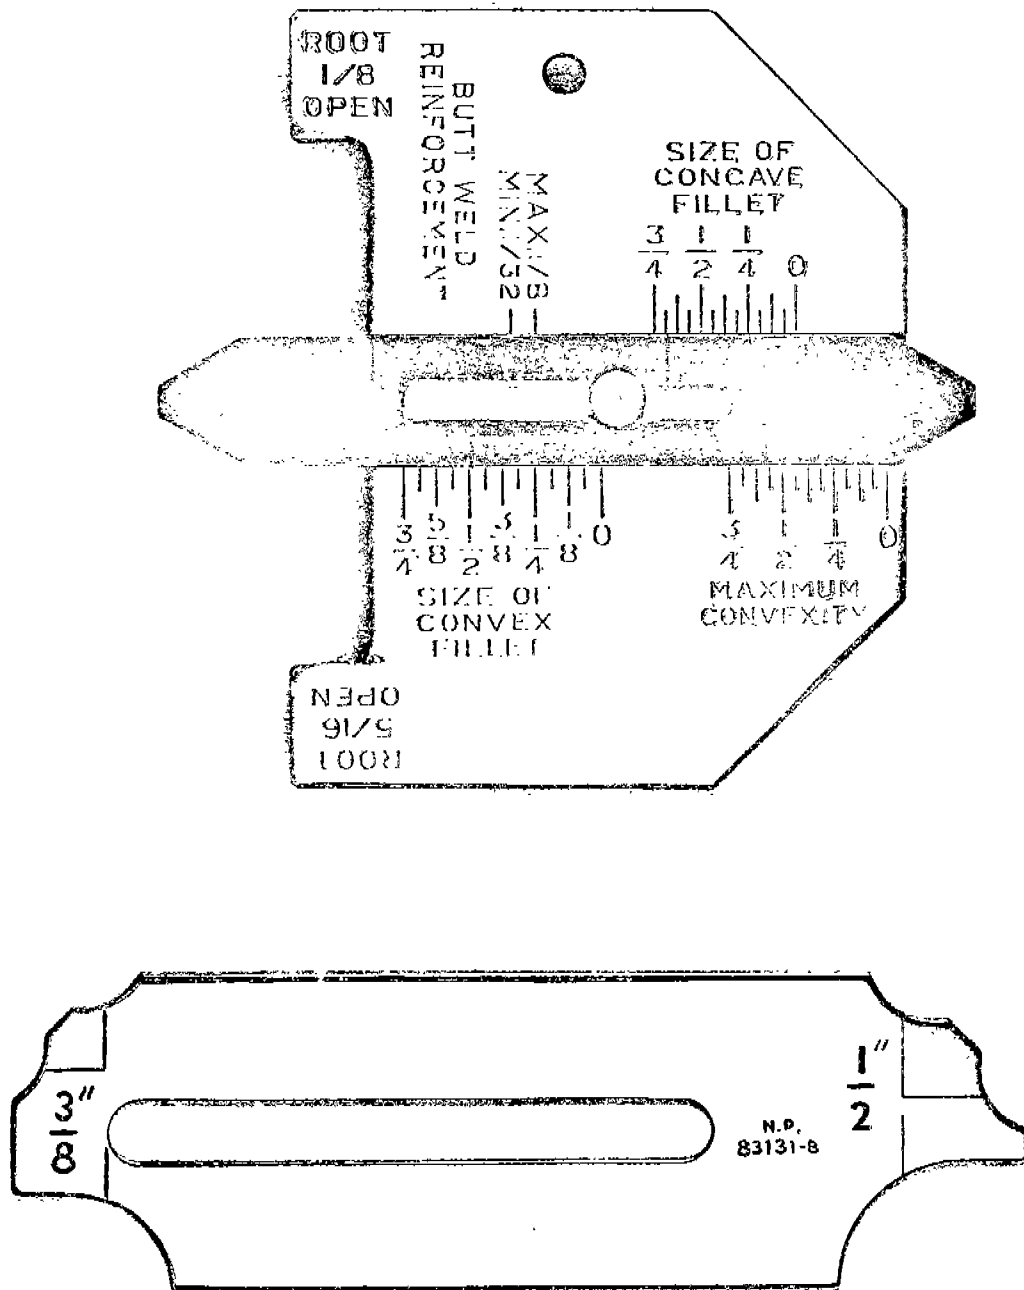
TYPICAL GAUGES FOR INSPECTING FILLET WELDS
